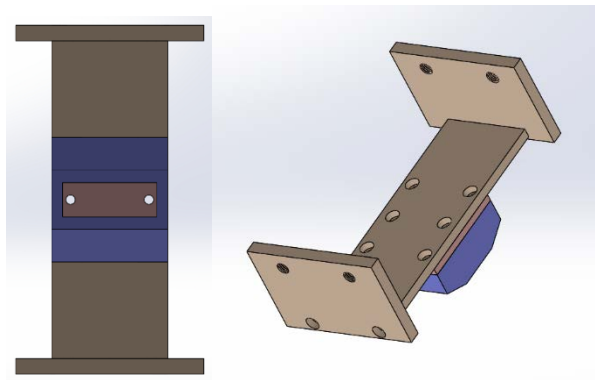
7 Assembly drawing of sensor case inside magnetizer unit-1
